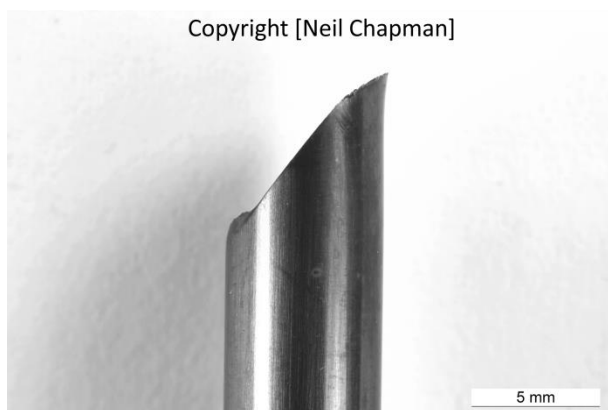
Low powered optical microscope image of fractured test specimen showing the typical 55° crack/fracture angle produced from fatigue testing in air using the 10-1-1-1 s waveform and non-precorroded test specimen
